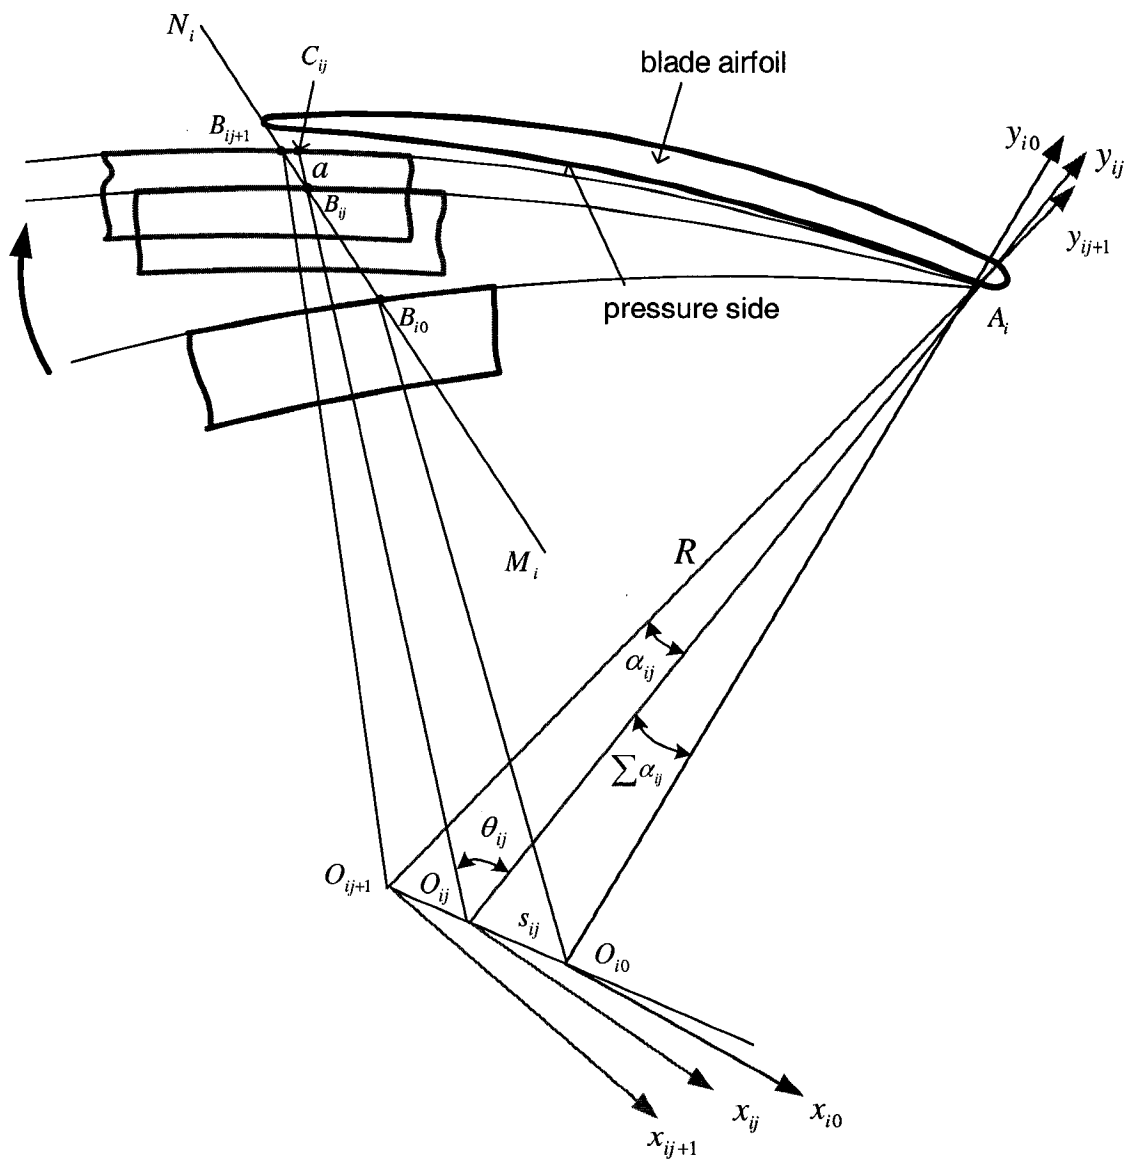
Tool movement 2 - the rotation of the tool centre around the exterior point,  $A_i$ , and the machining done with the outer side of the tool
